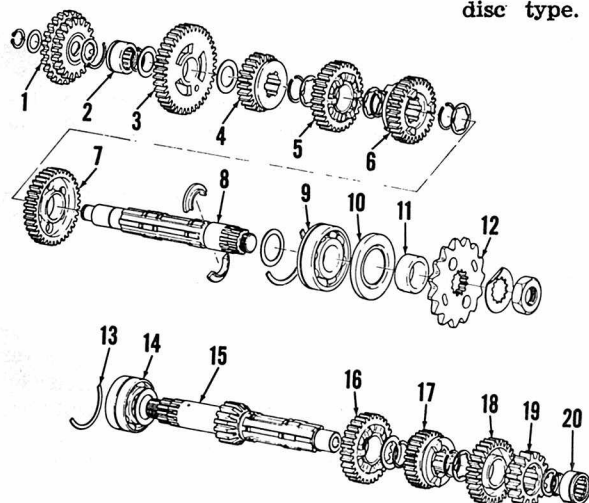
Exploded view of R5 transmission. Gears (5 & 16) are identical.
